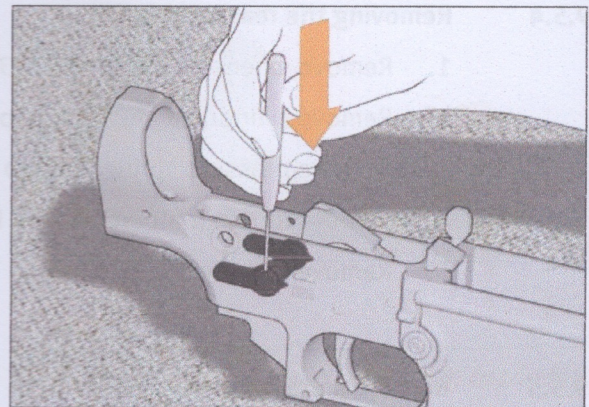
Extracting the clamping sleeve for the right-hand safety lever.
